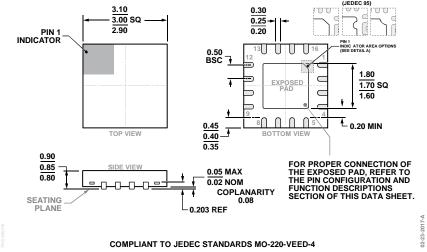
16-Terminal Lead Frame Chip Scale Package [LFCSP] 3 mm \times 3 mm Body and 0.85 mm Package Height (CP-16-51) Dimensions shown in millimeters
